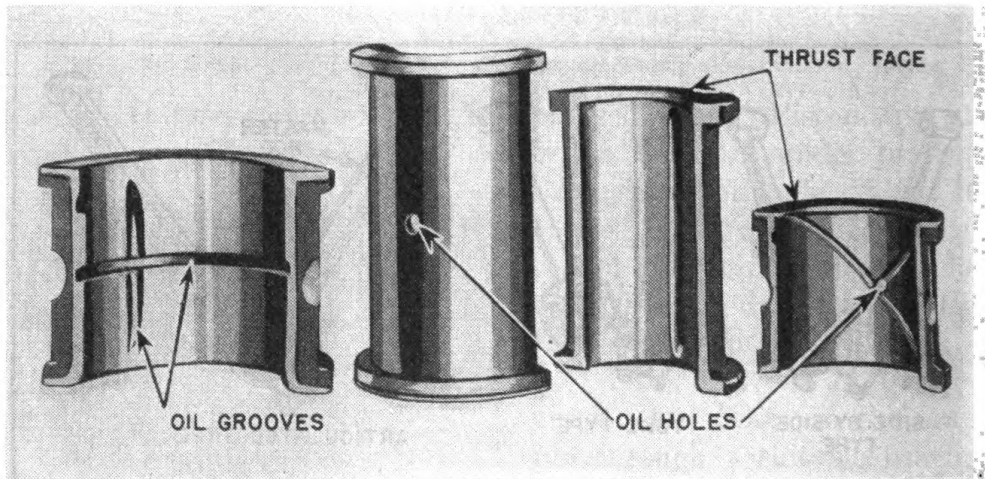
Types of grooving in connecting-rod bearings used with splash lubricating systems.
